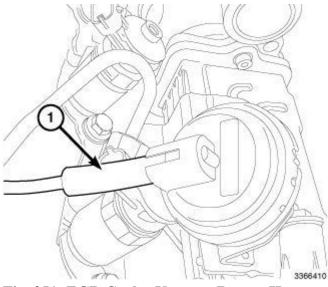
EGR Cooler Vacuum Bypass Hose Courtesy of CHRYSLER GROUP, LLC
